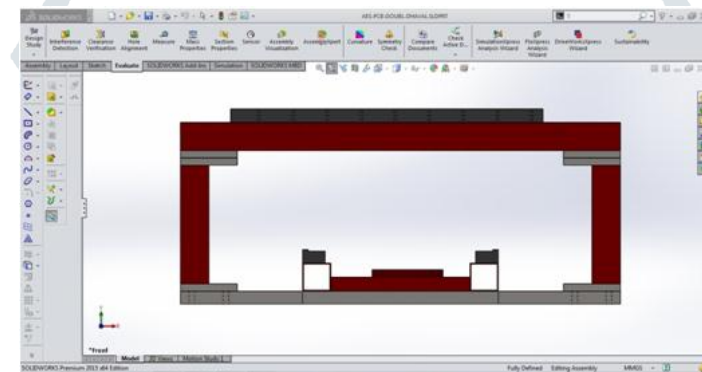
Front view of PCB Drill Mech SS 300 Structure
